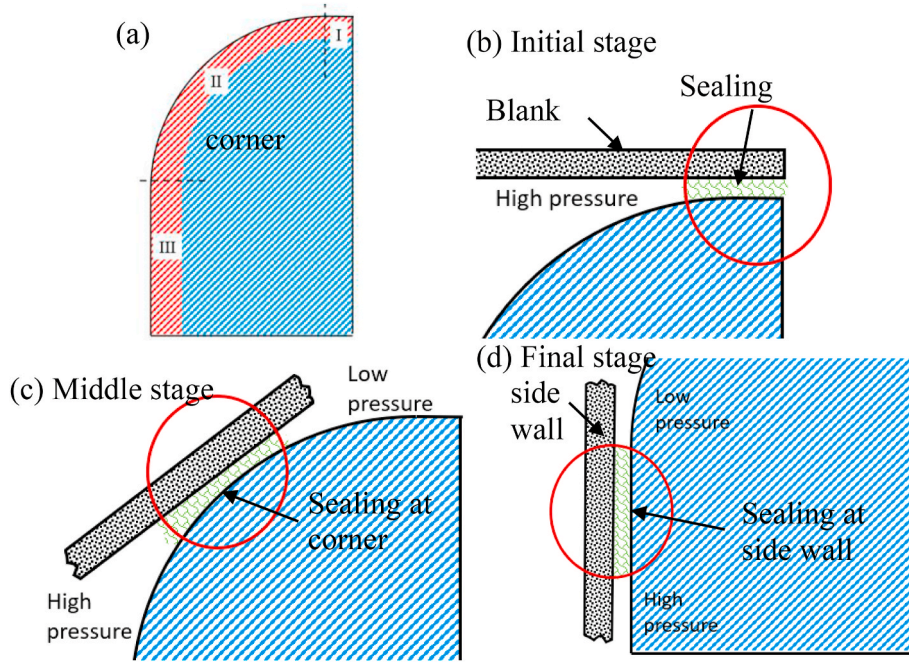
(a) Three areas of the die, and different sealing areas at different drawing stages: (b) initial drawing stage when blank contact with die annular plane area (I), (c) middle drawing stage when blank contact with die corner area (II) and (d) final drawing stage when blank sliding on die cylindrical side wall area (III).
